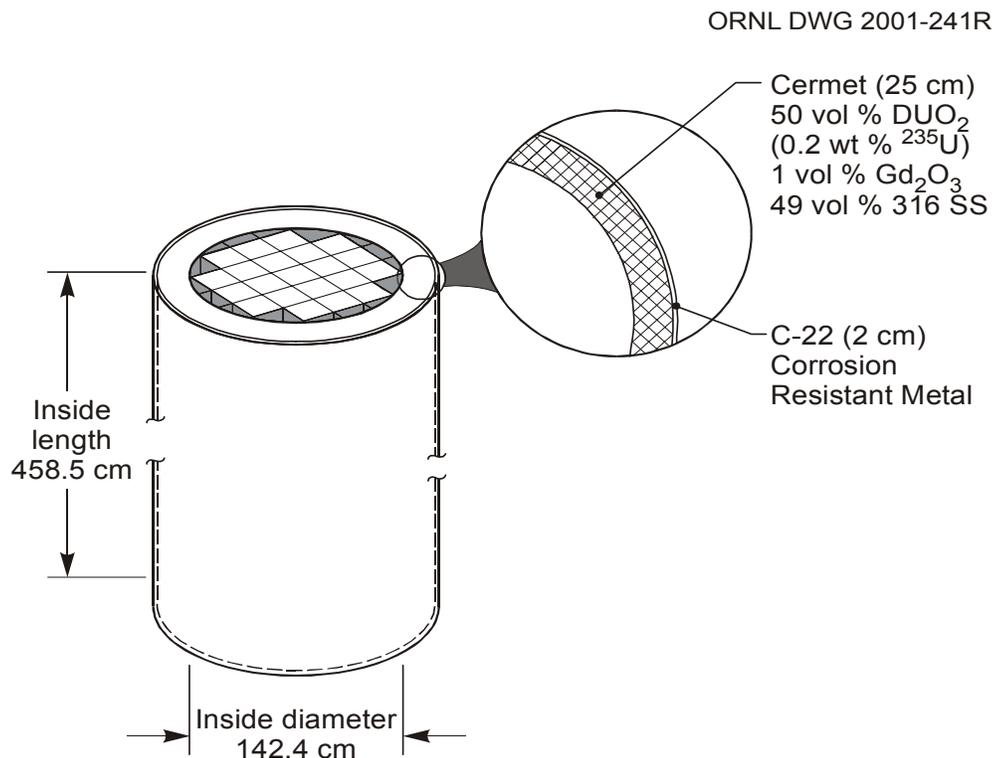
Shielded cermet WP for 21 PWR SNF assemblies.
